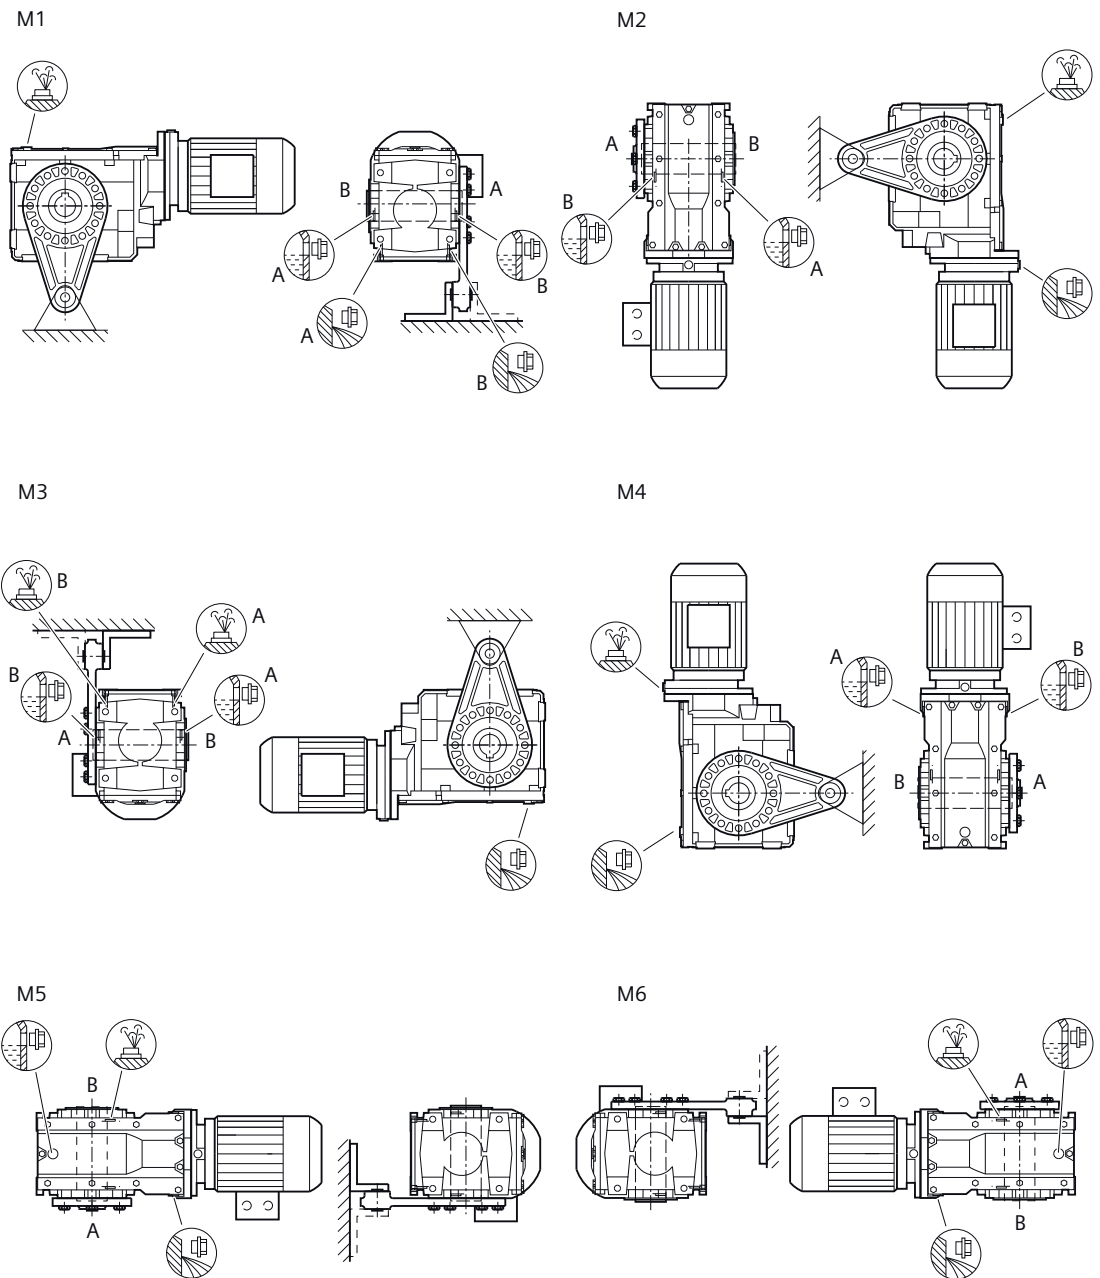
Mounting positions for bevel gearbox BAD shaft-mounted design, sizes 39 - 49
